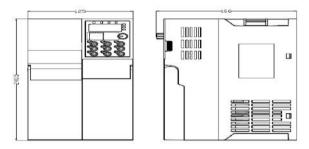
HE100 plastic 11-15KW structure external dimension and installation dimension diagram
